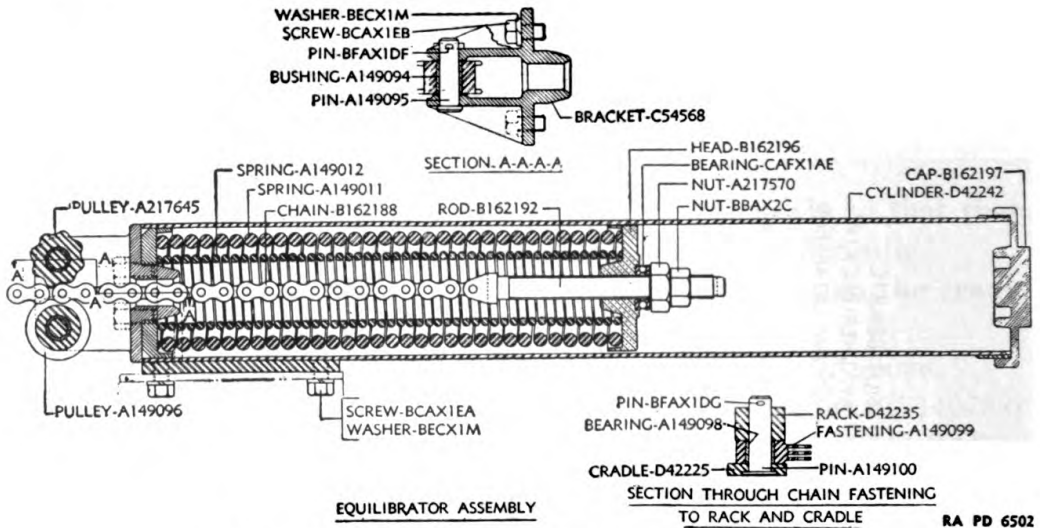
Equilibrator assembly, M3A1 carriage.
